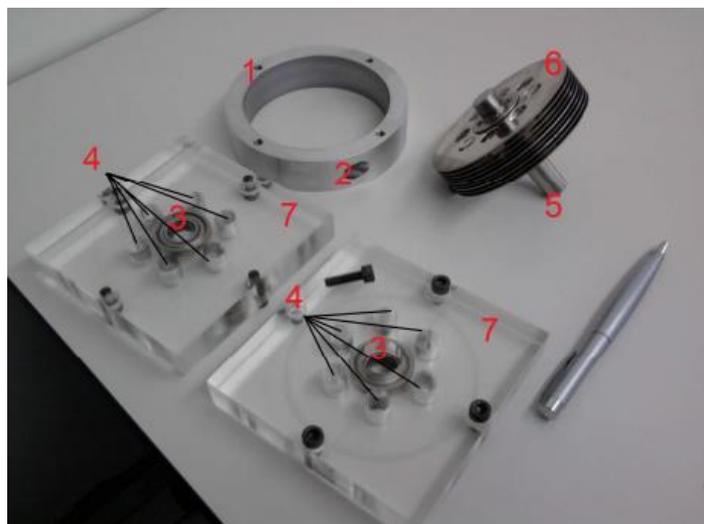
Tesla turbine disassembled. (1) Housing; (2) Fluid inlet; (3) Bearings; (4) Fluid outputs; (5) Shaft; (6) Discs; (7) Sides.
